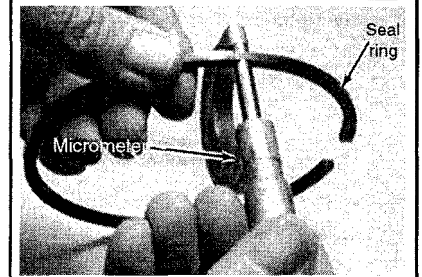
If they look worn, check crankcase seal ring thickness with a micrometer
